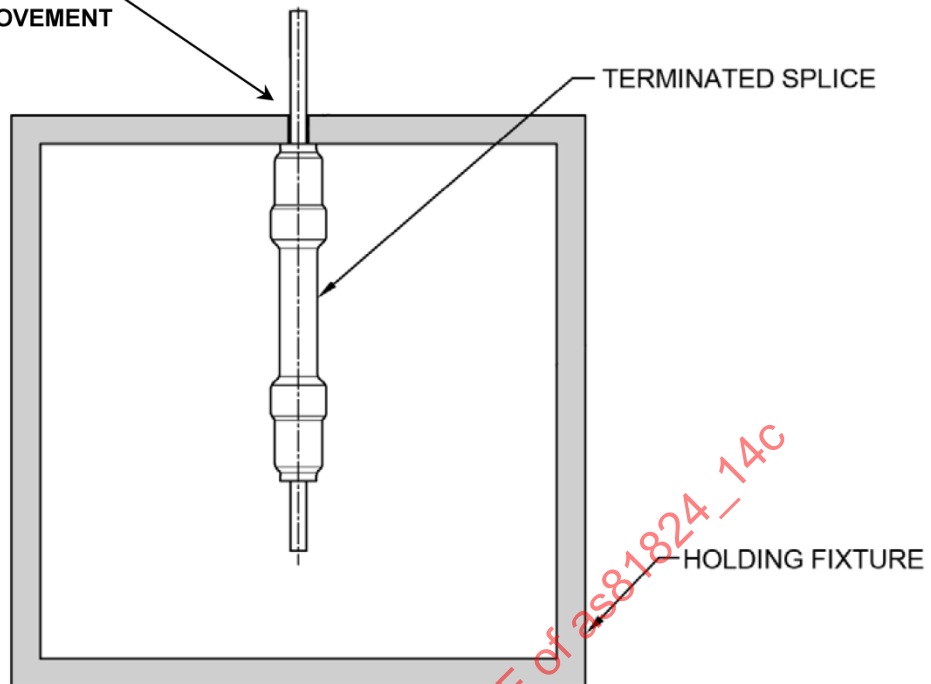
FIXTURE FOR INSULATION SLIP RESISTANCE TEST
